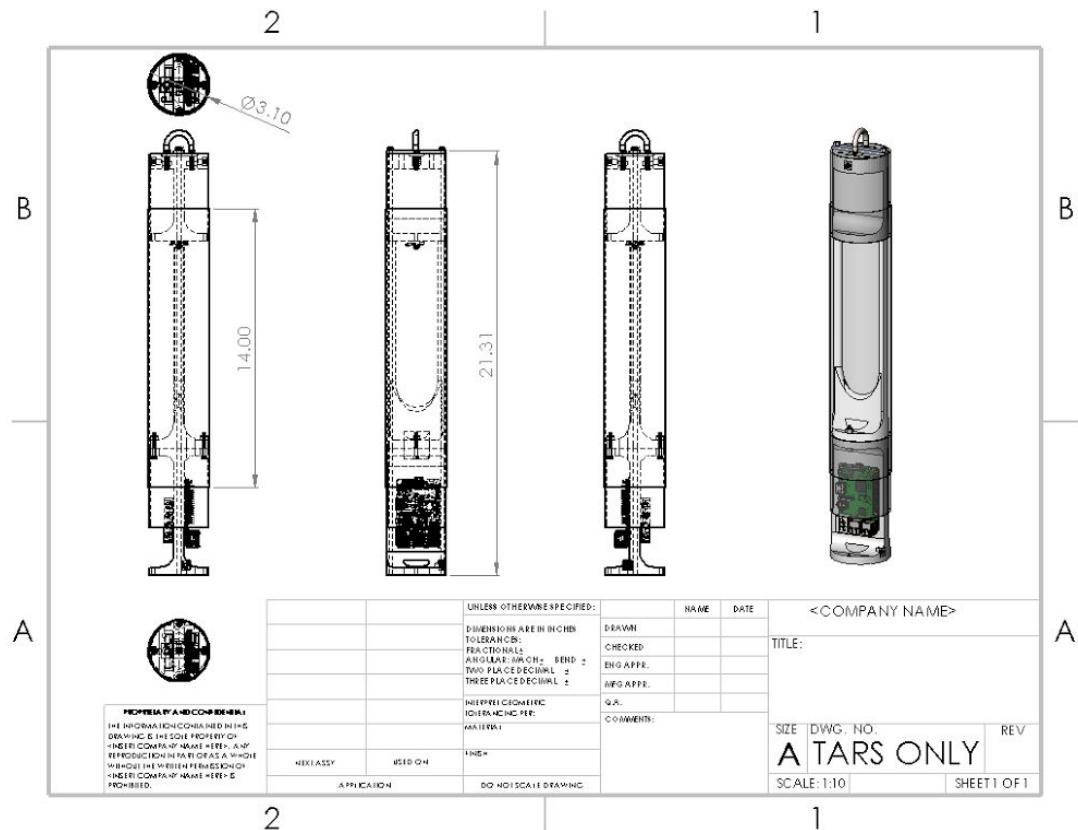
An assembly drawing of TARS with major dimensions
